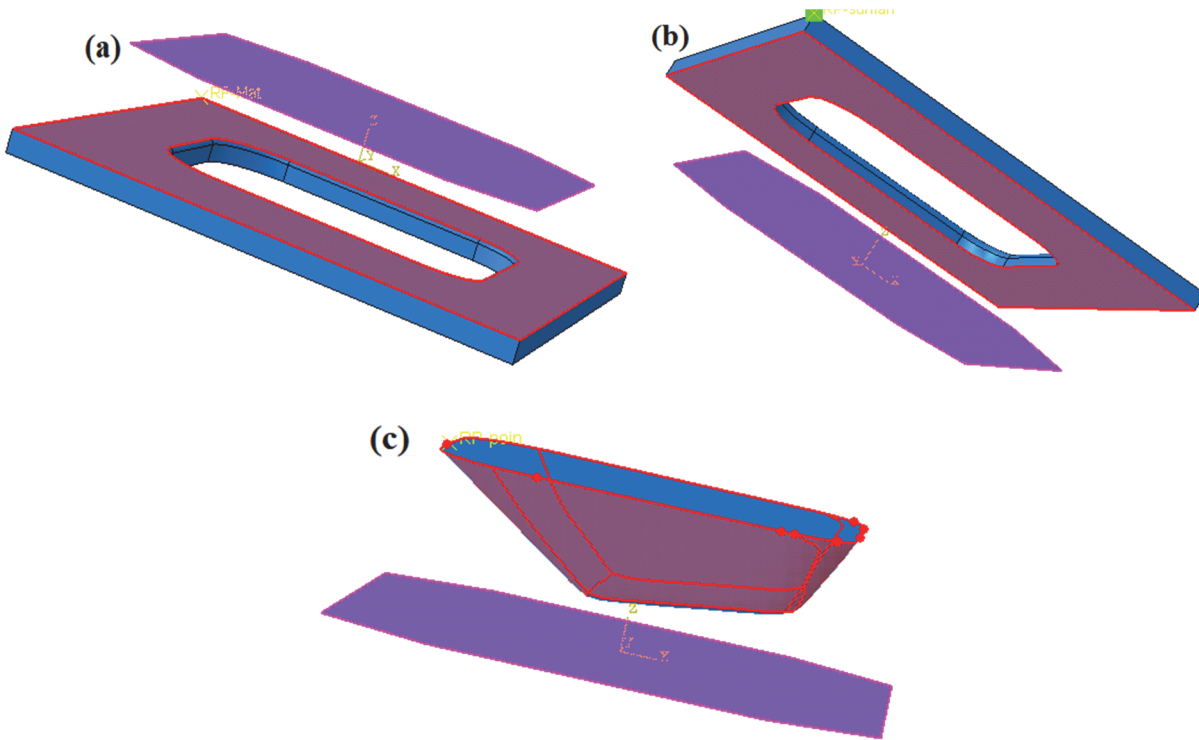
Tools-blank contacts: (a) Sheet metal-blank holder, (b) Punch-sheet metal, (c) Die-sheet metal.
